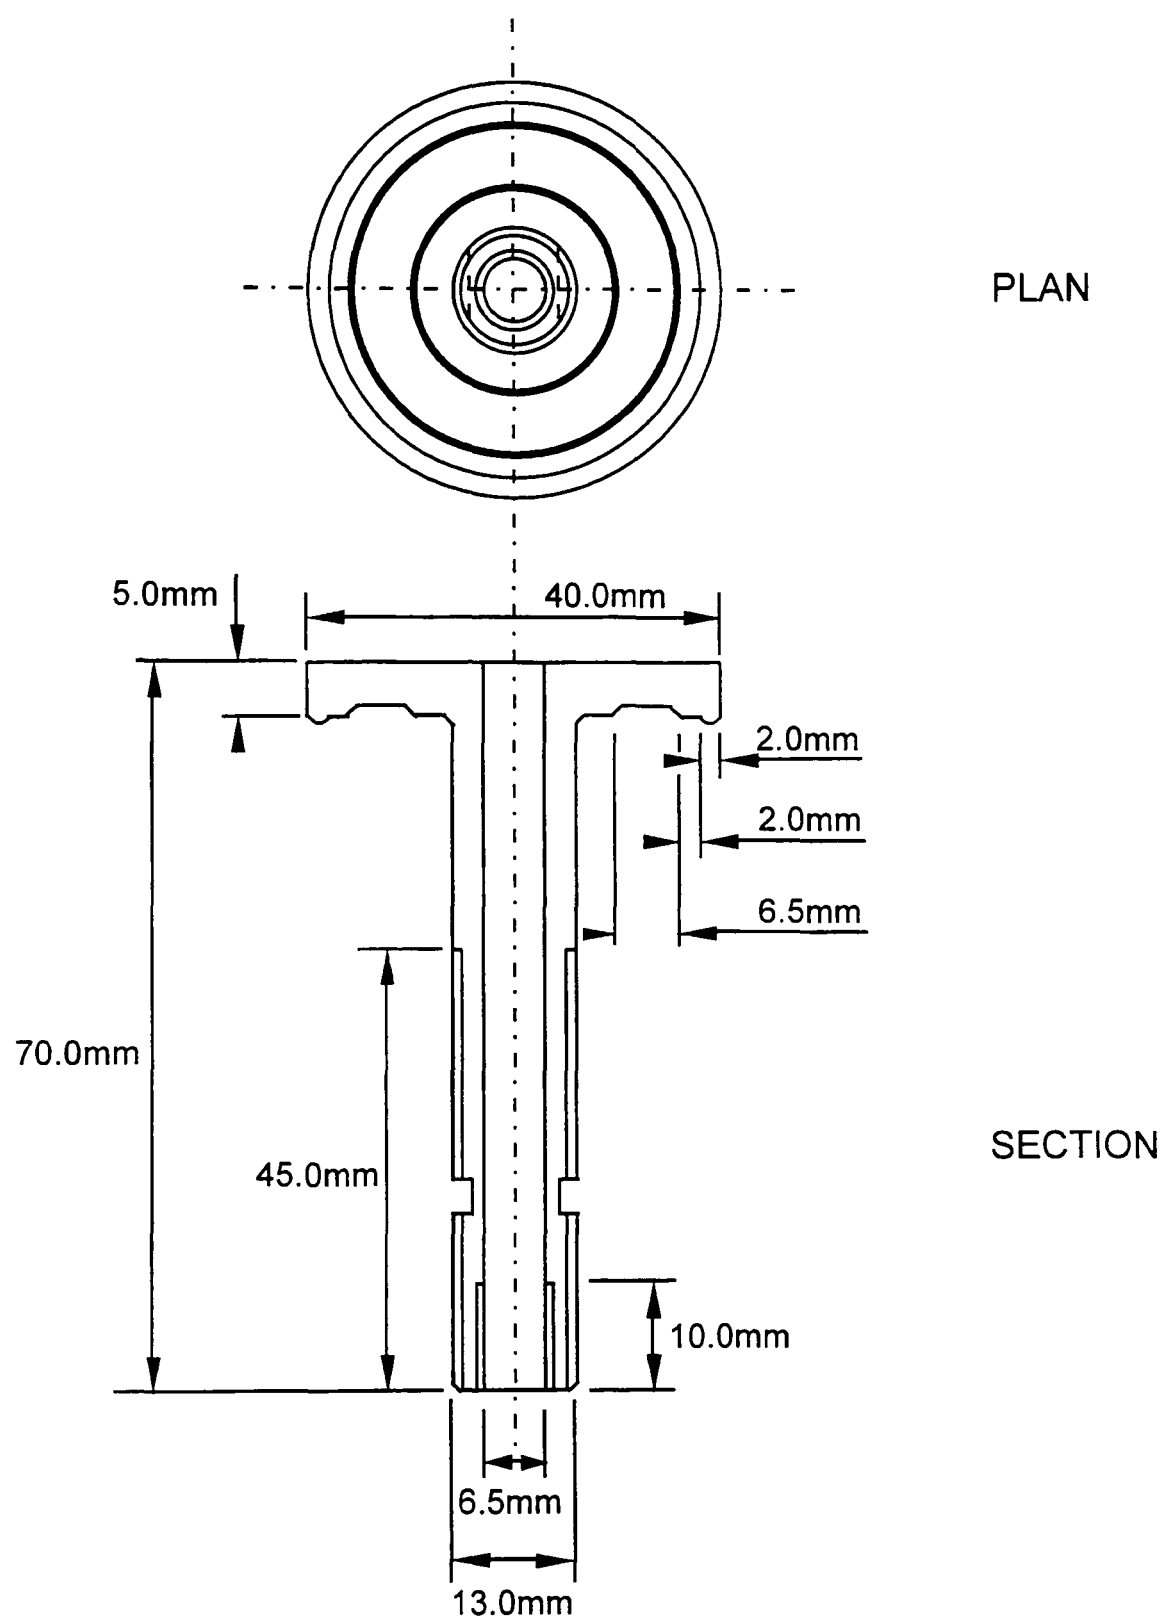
Sketch of stainless steel tunnel fitting (approximately full scale)
